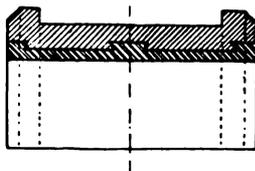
White-metal lined Bearing, with Dovetailed Grooves.
